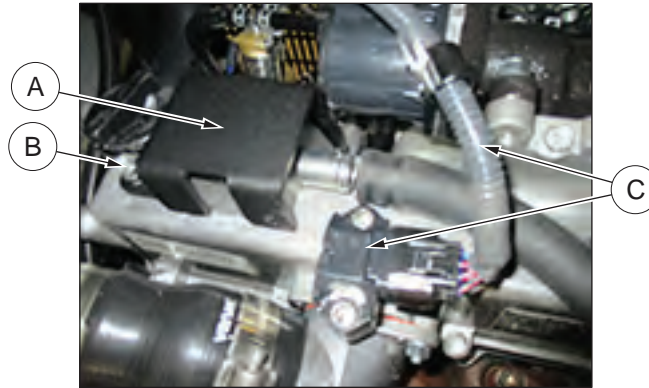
Parts Must be Moved to Accommodate Bracket
